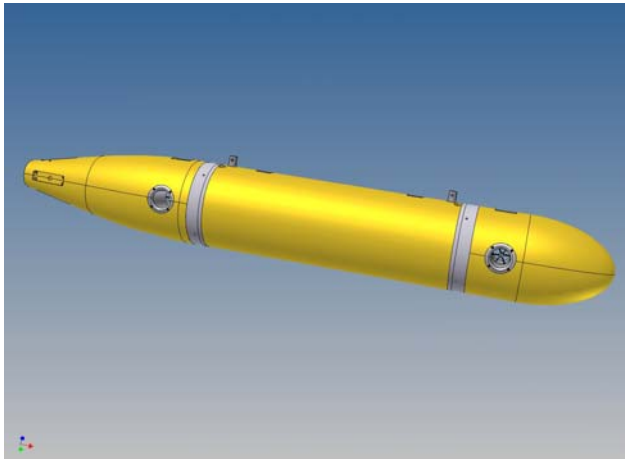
CAD drawing of the Autosub model showing forward and aft thruster tunnels (control surfaces and stern propulsor not shown)
